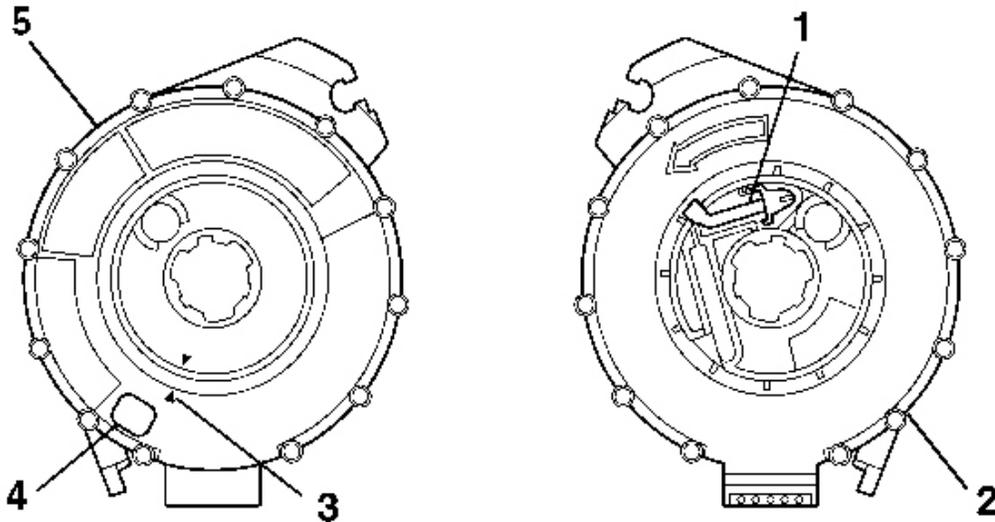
View Of Block Tooth Of Steering Shaft Assembly In 12 O'clock Position
